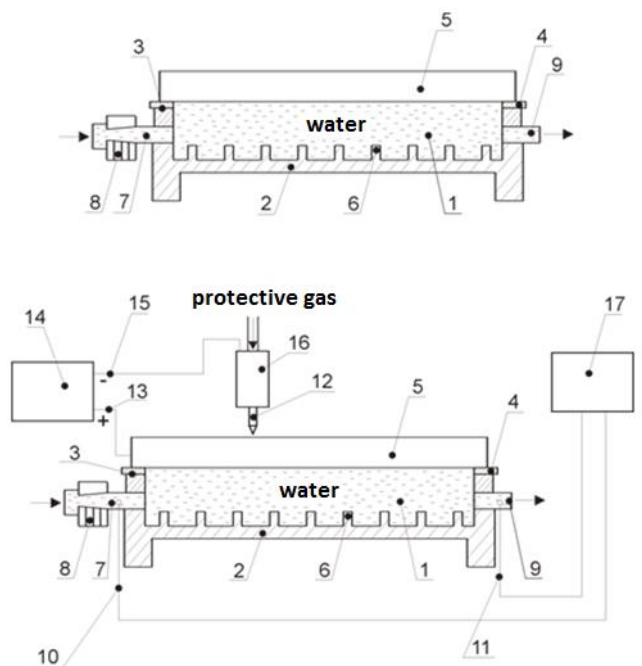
Construction of the flow calorimeter dedicated to heat measurements in welding processes, patent No. 211283 [22].
